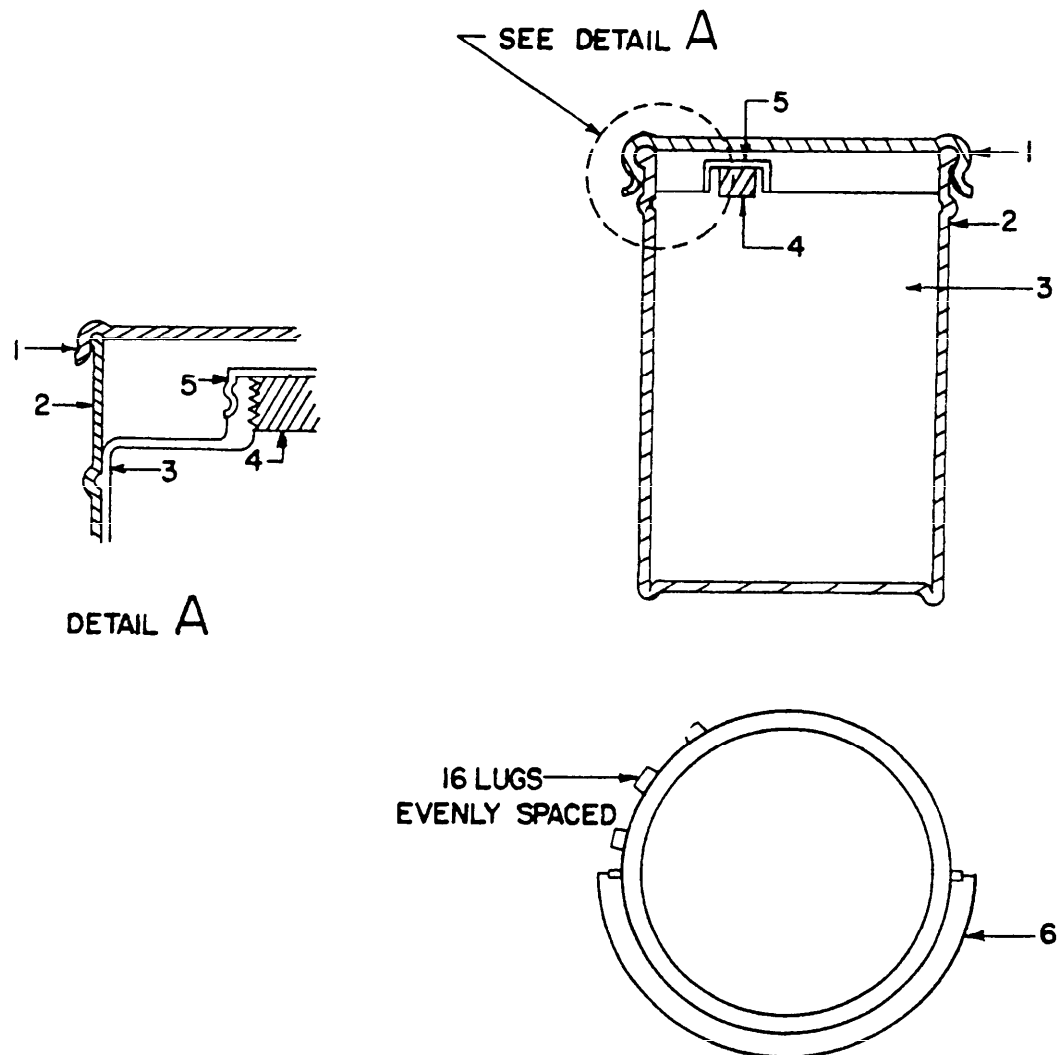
Steel pail head opening for type I overpack (see 40.1.2.1).
